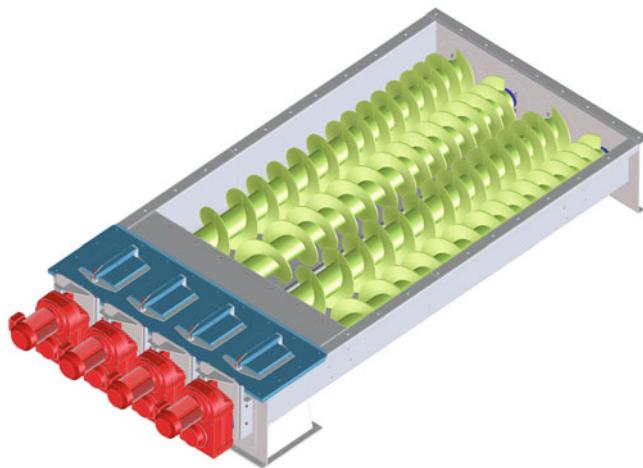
Design of a screw floor under a small chip silo, by Knoblinger [5]
